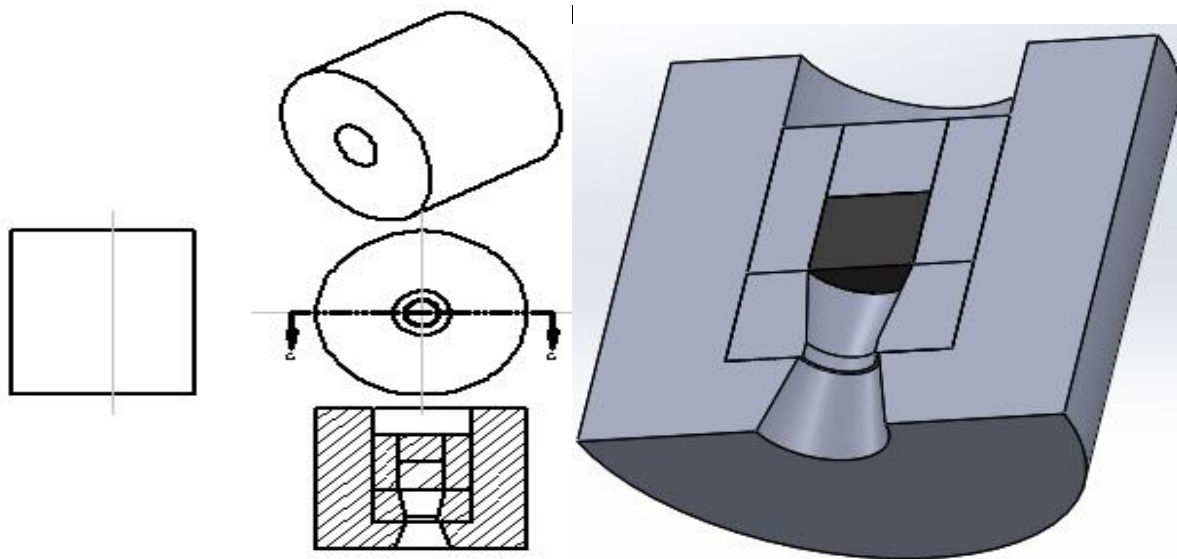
Schematic drawing with (a) 2D and (b) 3D model of assembly extrusion die
